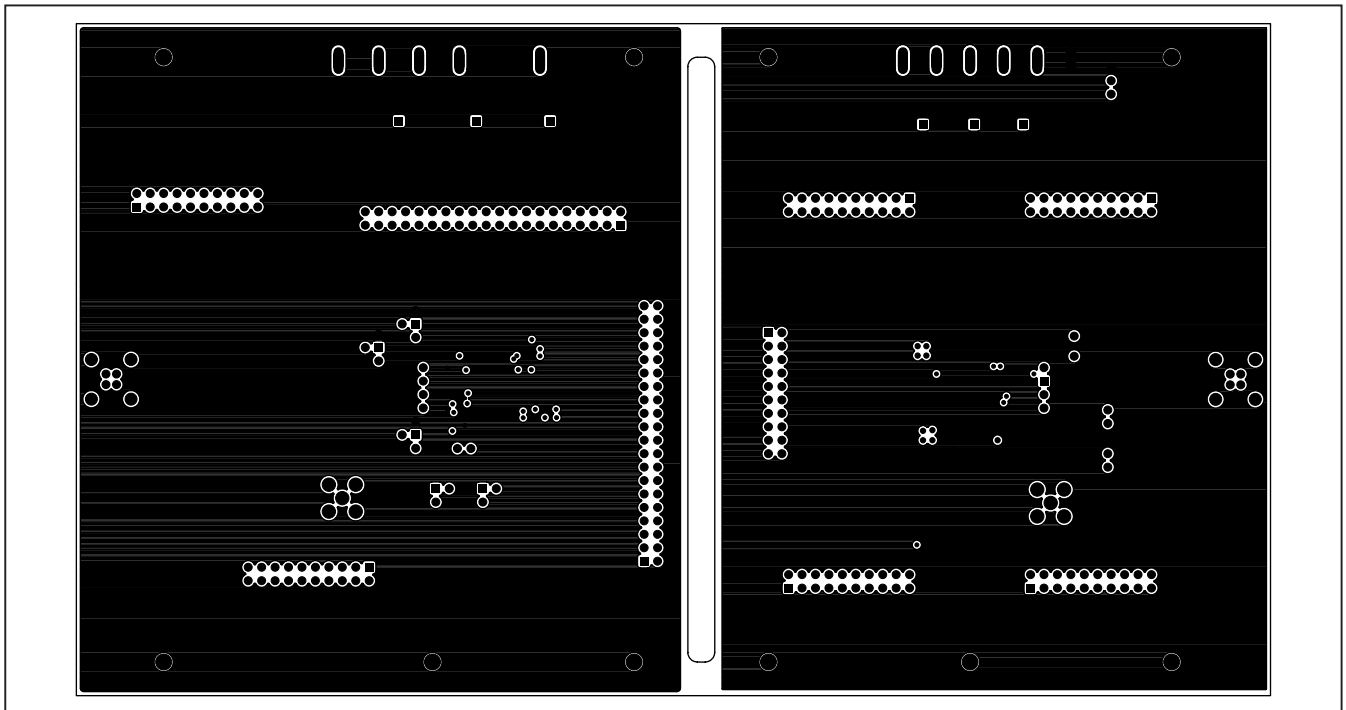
MAX9217/MAX9218 EV Kit PCB Layout—Inner Layer 3
